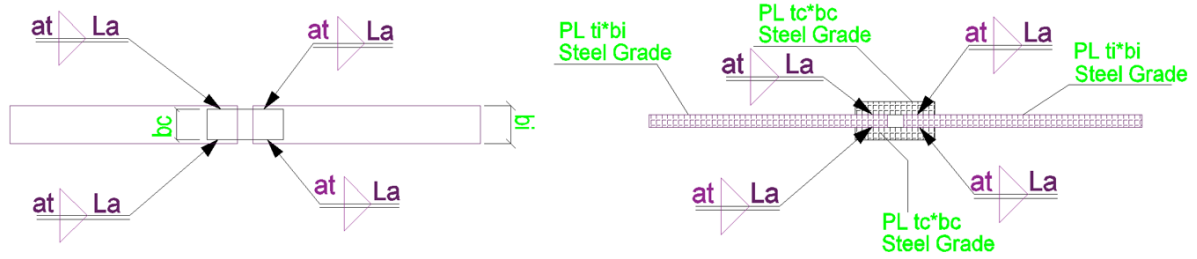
The configuration of specimens with parallel fillet weld
